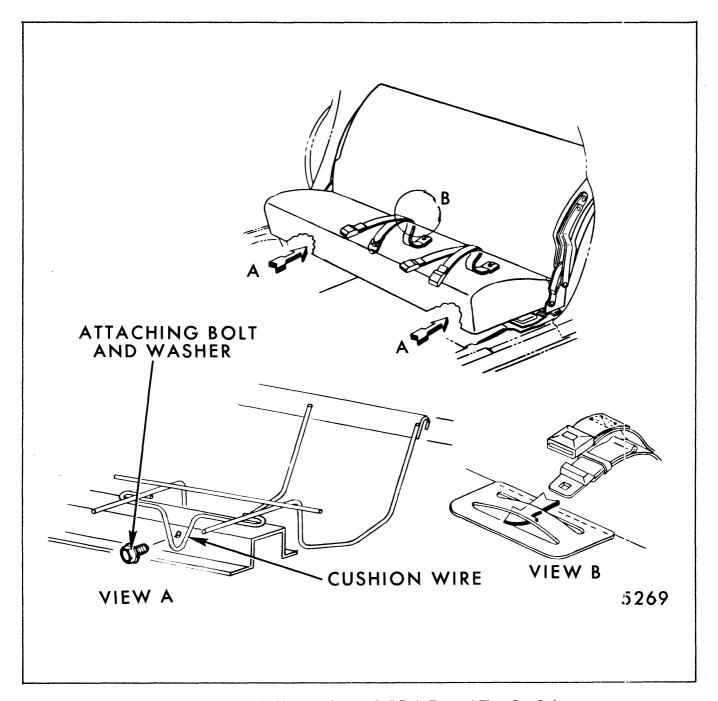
Second Seat Cushion Attachment - "A" Body Two and Three-Seat Styles
